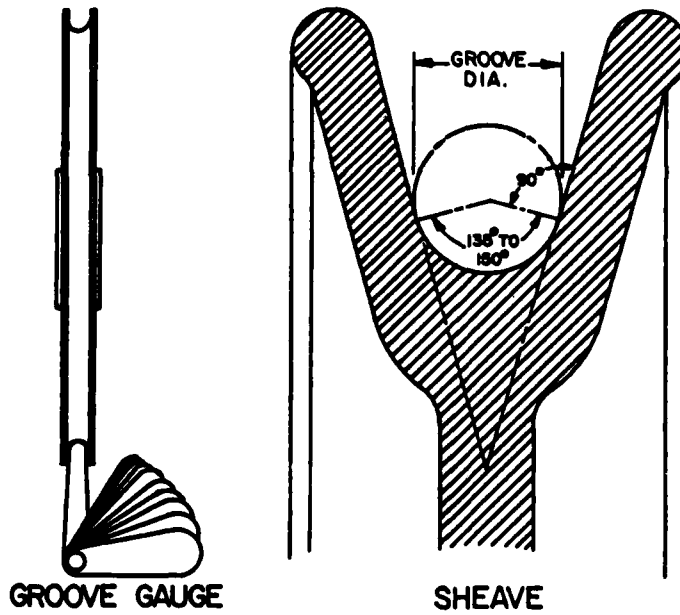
SHEAVE GROOVE DIMENSIONS
